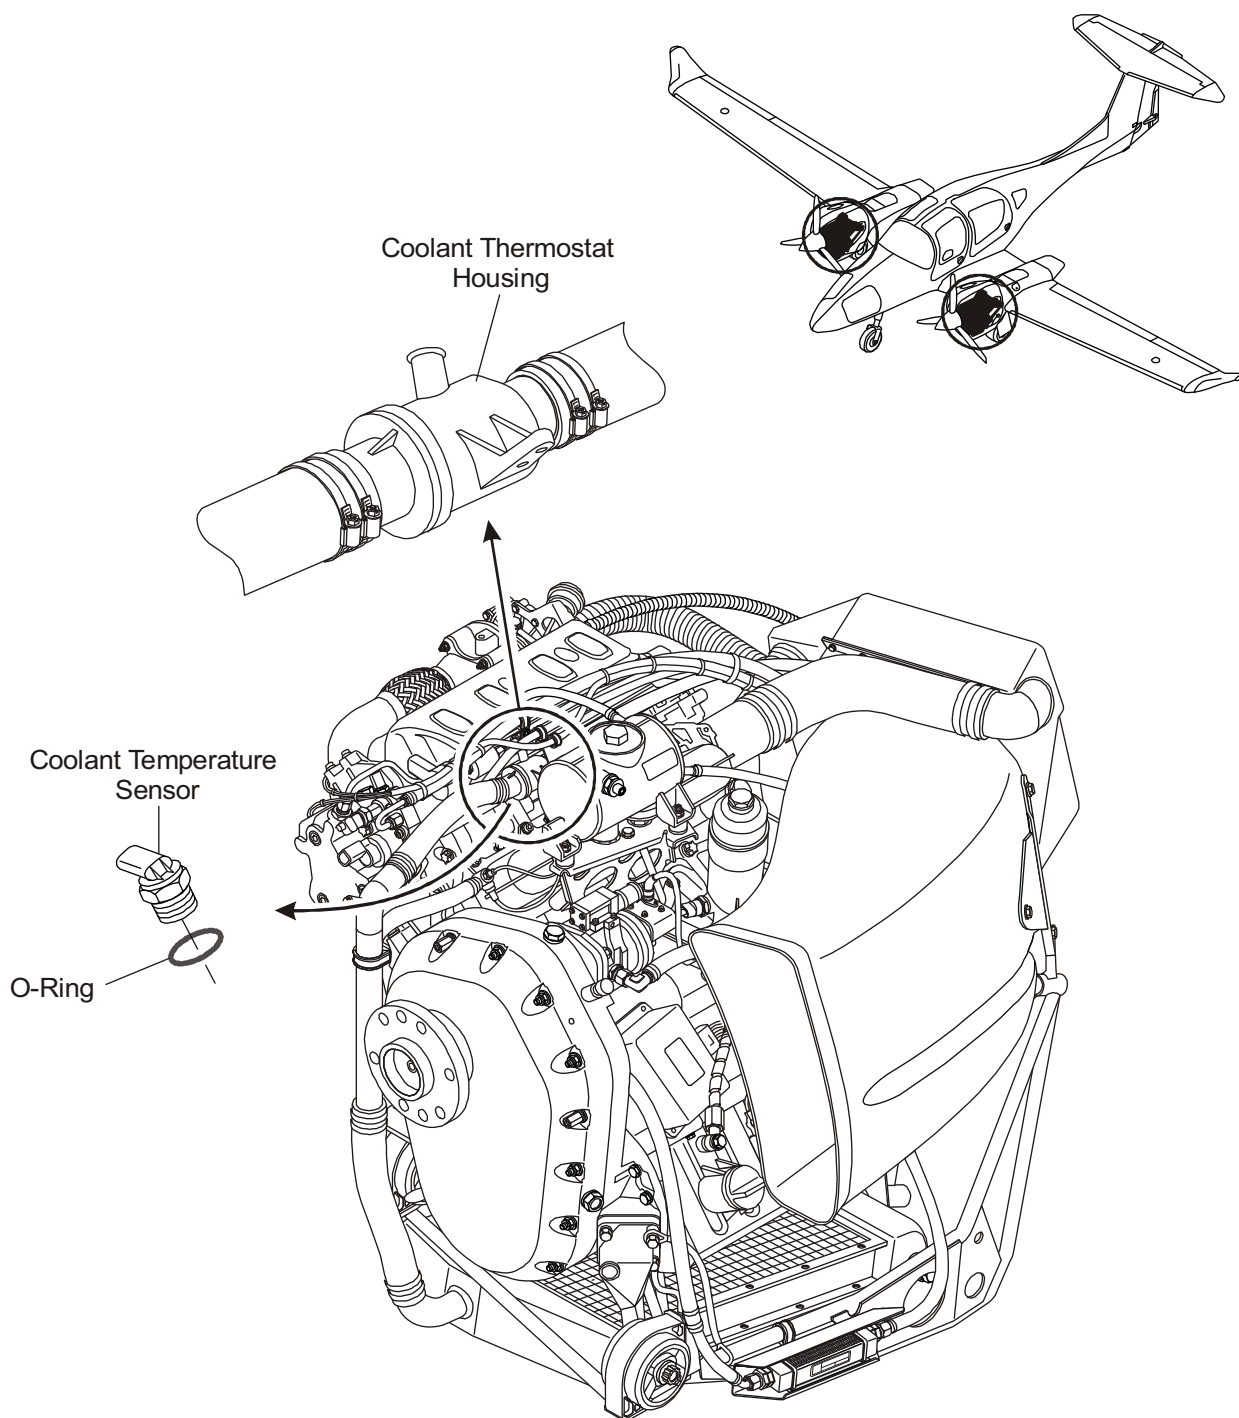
Engine Coolant Temperature-Sensor - Installation
